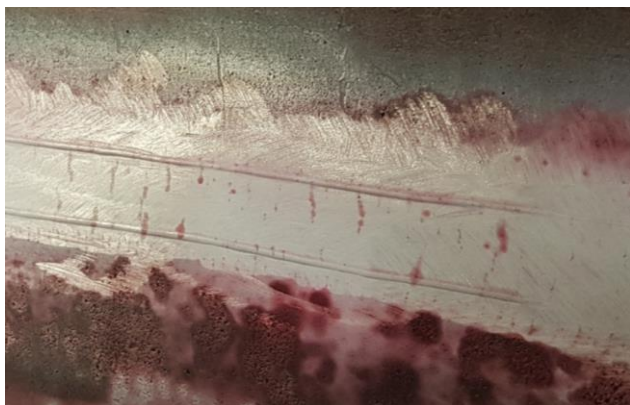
Condition of the circular joint during the grinding process and crack removal (traces of cracks can still be noticed).
